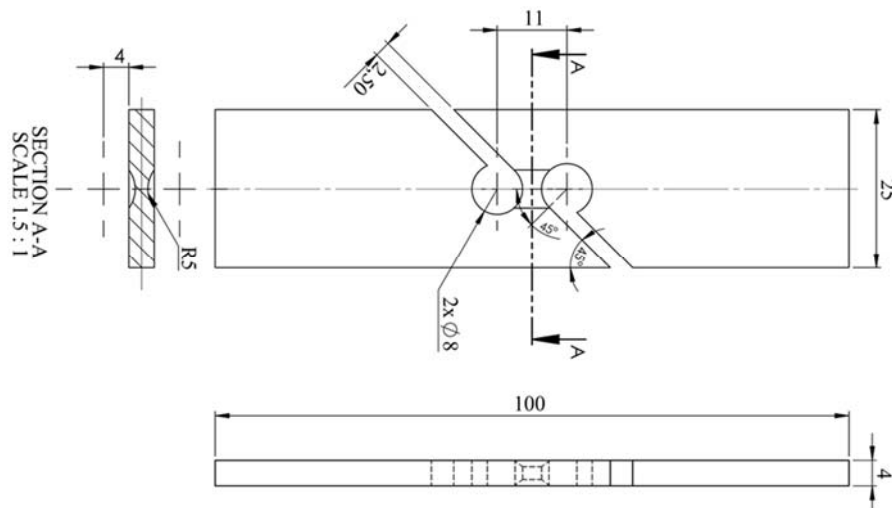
Plane shear specimen of X60 piping steel (X60_PSG).
